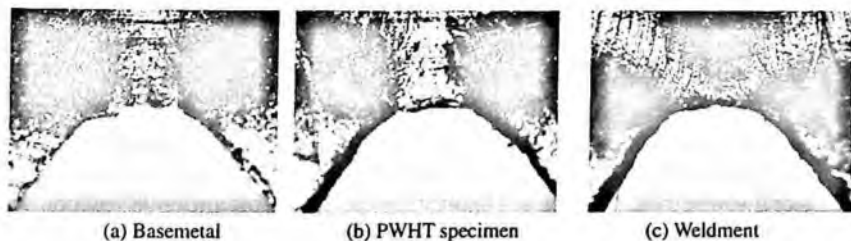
Optical photos for the basemetal, PWHT specimen and weldment at notch tip.
